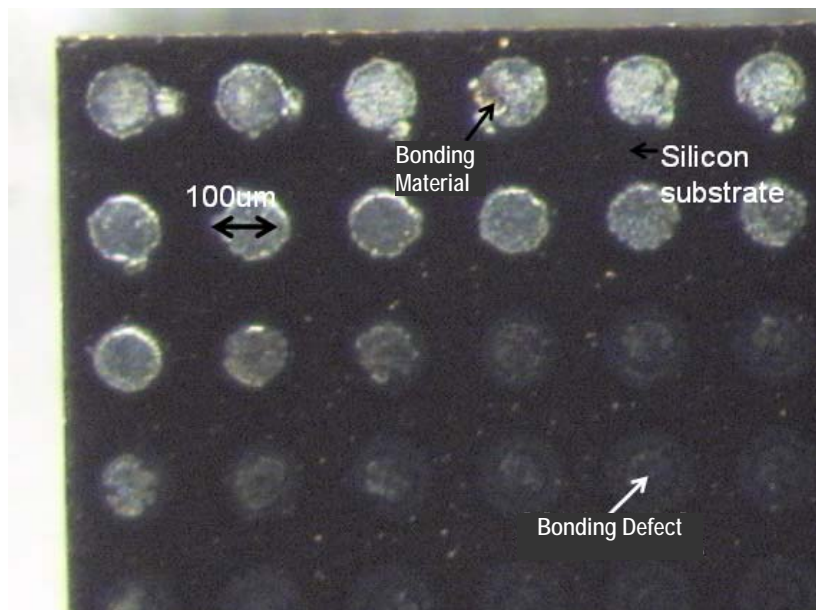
Photo of sample bonding using the flip chip packaging method (sample surface after the shear test).
